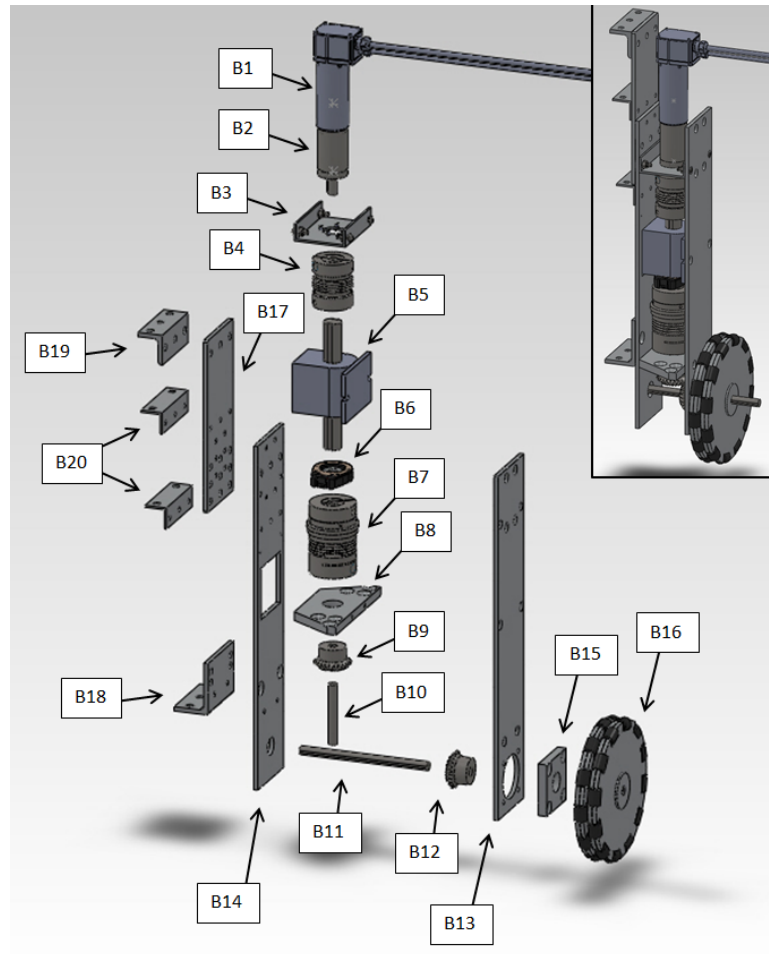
Exploded view of the motor-wheel module. Refer to Table 3.3 for part designations.
